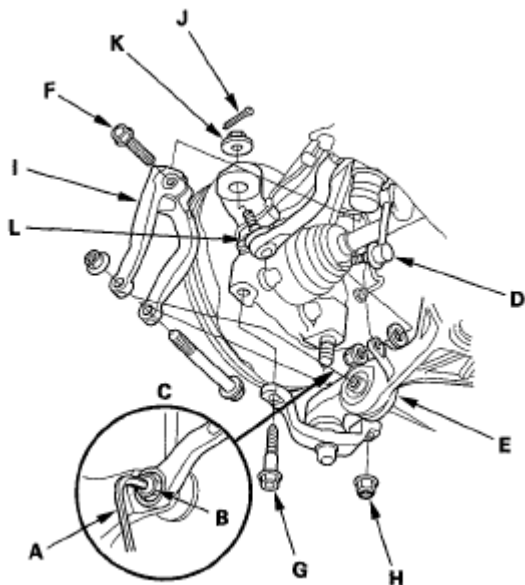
Identifying Stabilizer Link, Knuckle Holder Bolts And Steering Tie-Rod End Ball Joints
